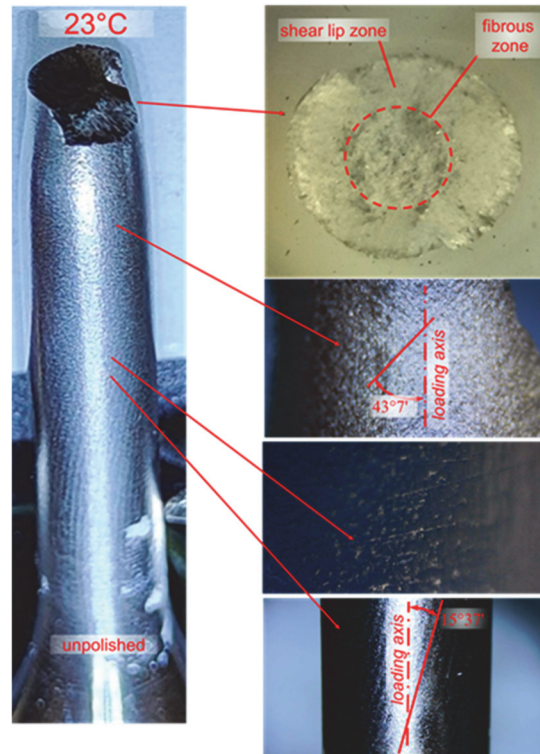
Fractured specimen at a temperature of 25 °C. Surface defects are visible on the specimen. The fracture surface corresponds to ductile rupture. Slip lines intersect in the neck region of the specimen.
